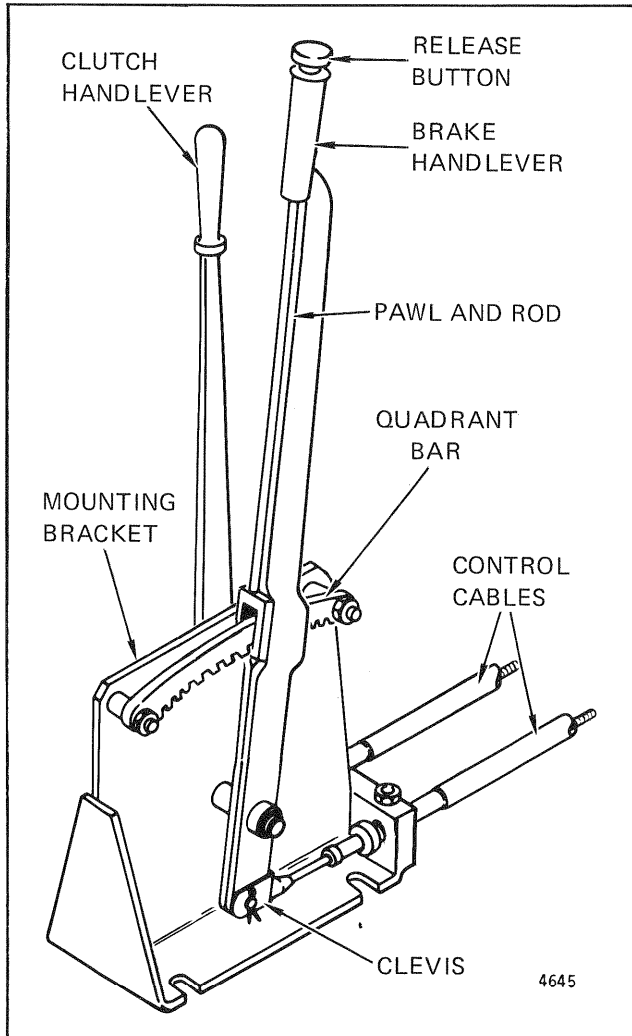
CONTROL ASSEMBLY, DIRECT DRIVE WINCH
